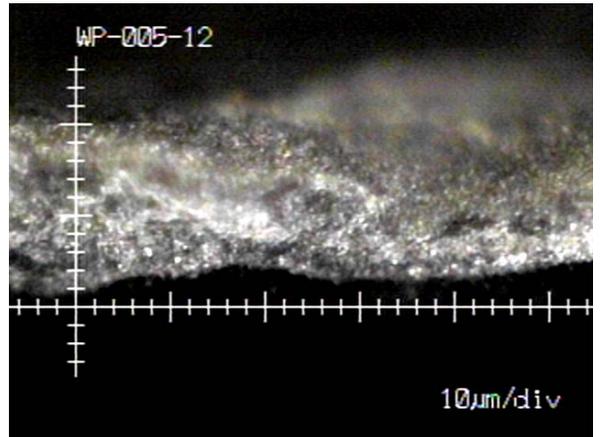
Blade used to cut ChoiceDek material after 125 feet of cutting.
